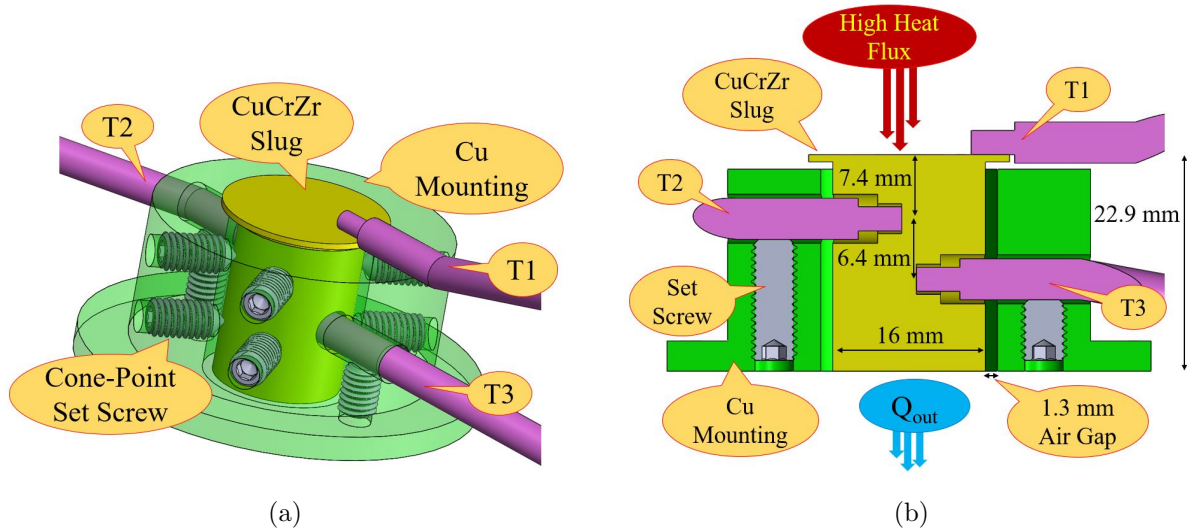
(a) Heat Flux Sensor CAD showing CuCrZr slug and Cu mounting assembly and (b) Cross-section view showing the thermocouples T1, T2 and T3.
